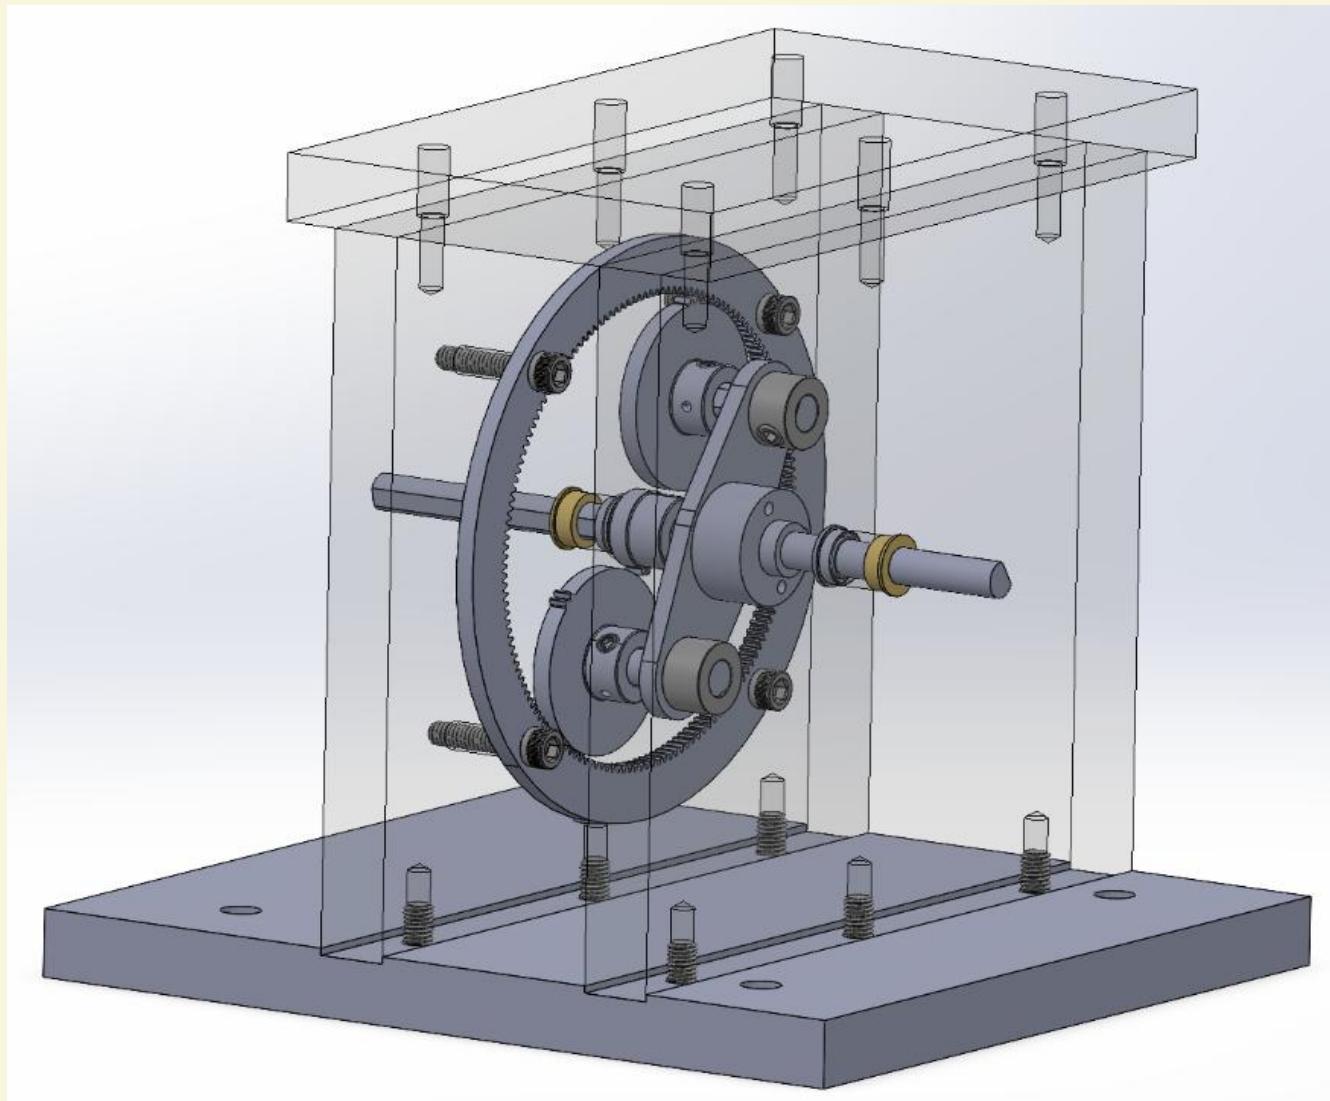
Full Assembly of the transmission system showcasing the acrylic walls and base, the gears and shafts and the collars, bearings and screws.
